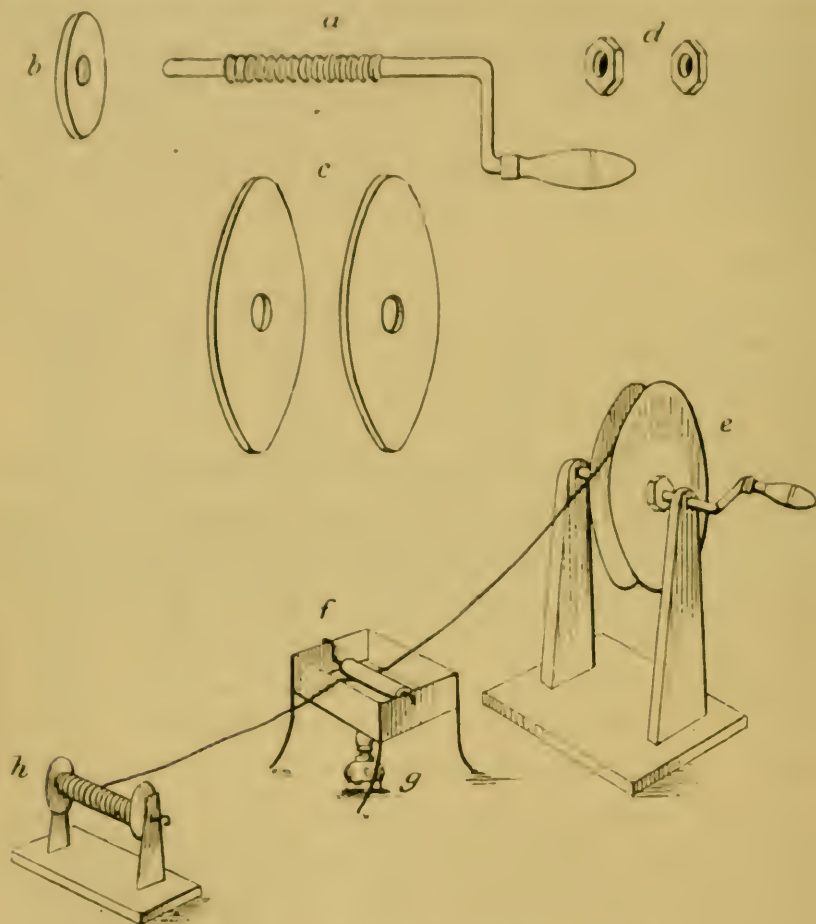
SECTION WINDER, SHOWING PARTS.
